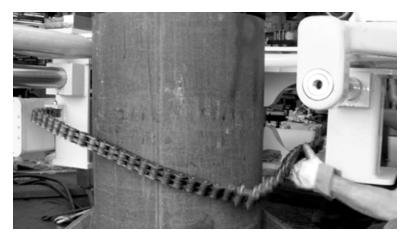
With the crane holding the saw in place, wrap the clamping chain around the workpiece.
